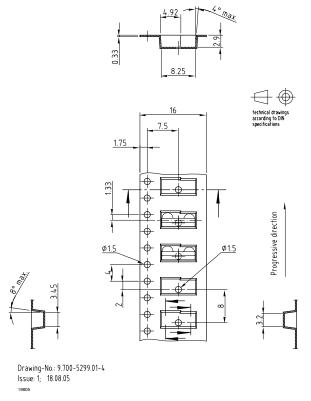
Tape for 2.74 - mm Package Side View Oriented
